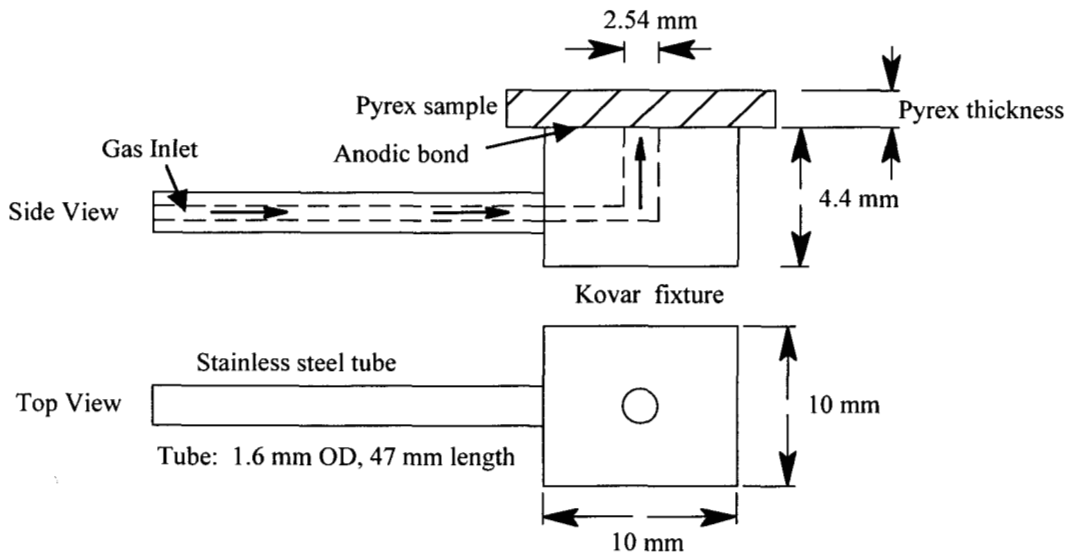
Dimensions and layout of the Kovar burst test fixture.
